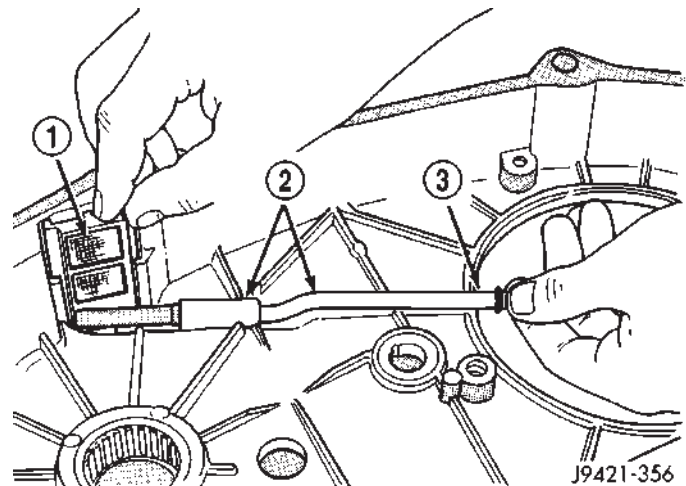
Oil Pickup Tube And Filter Position In Rear Case
